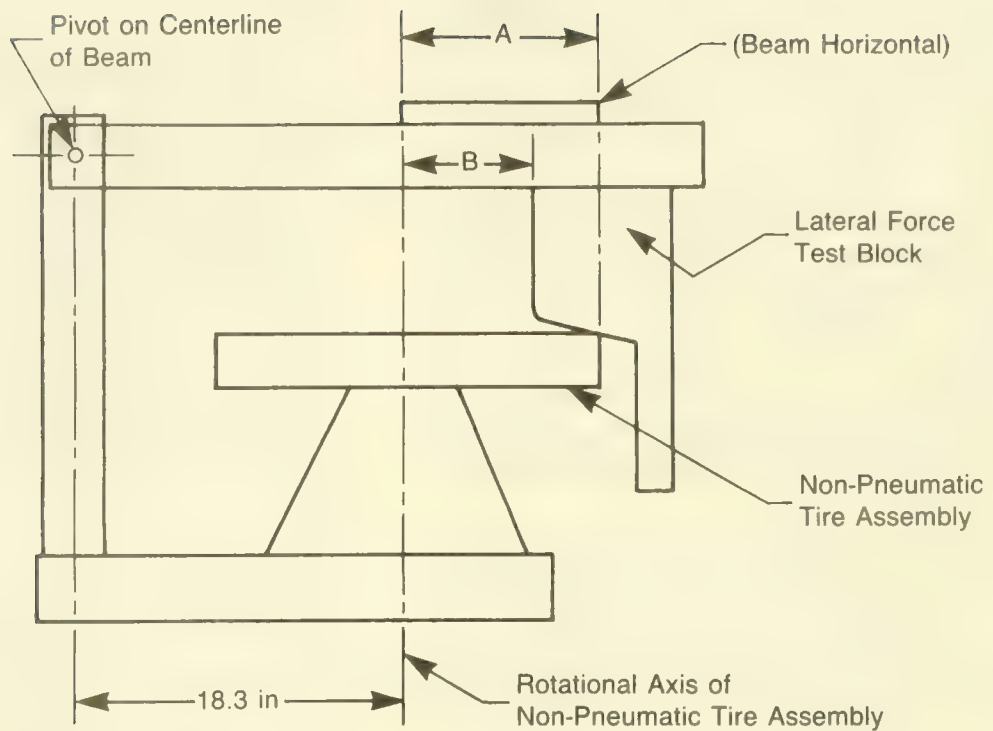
Lateral Force Test Fixture (Dimension in Inches)
